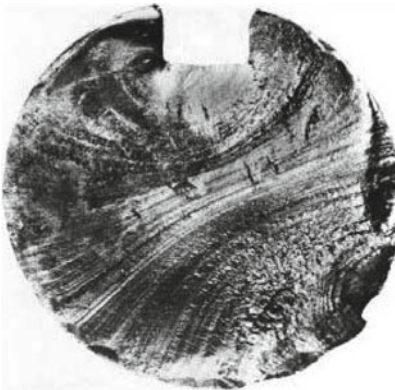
Failure case due to fatigue crack growth on a shaft
